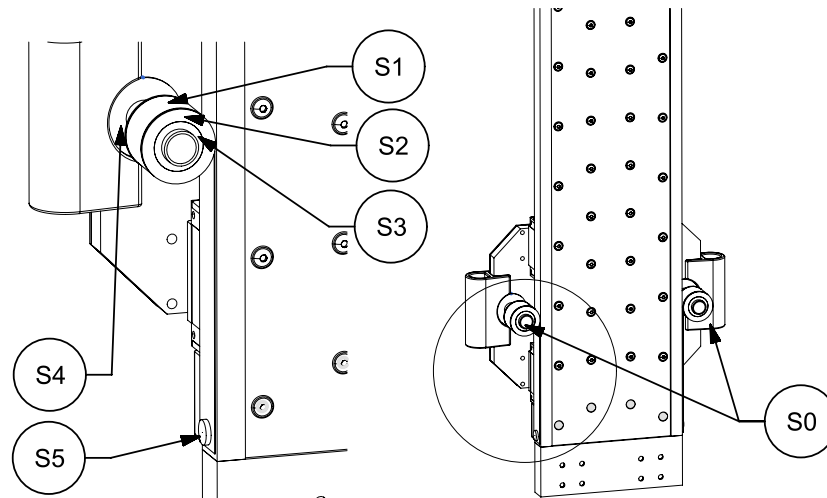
Constant-force spring mechanism (S) with: spring assembly (S0), spring (S1), spool (S2), bearing (S3), spool-mount (S4), and spring-mount (S5).
